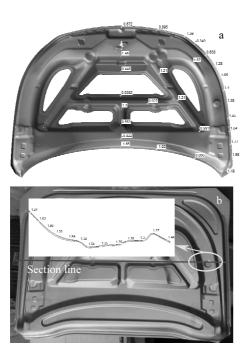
Springback compensation (a) and measurement of springback (b) for aluminum alloy inner panel of engine cover
